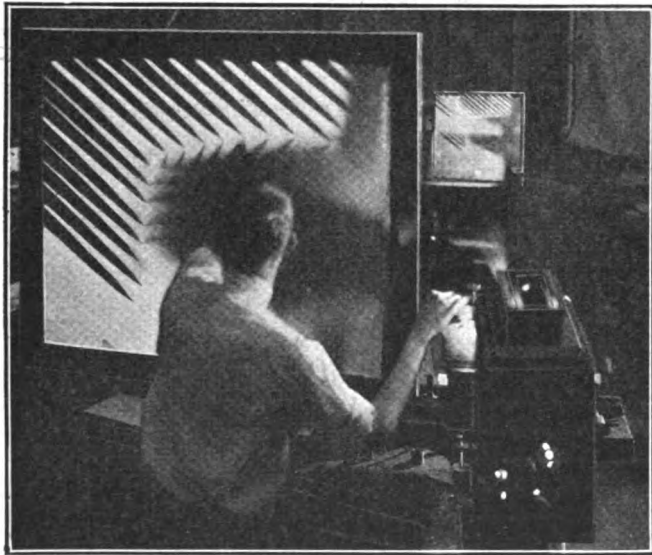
HARTNESS COMPARATOR FOR GAGING GEARS
